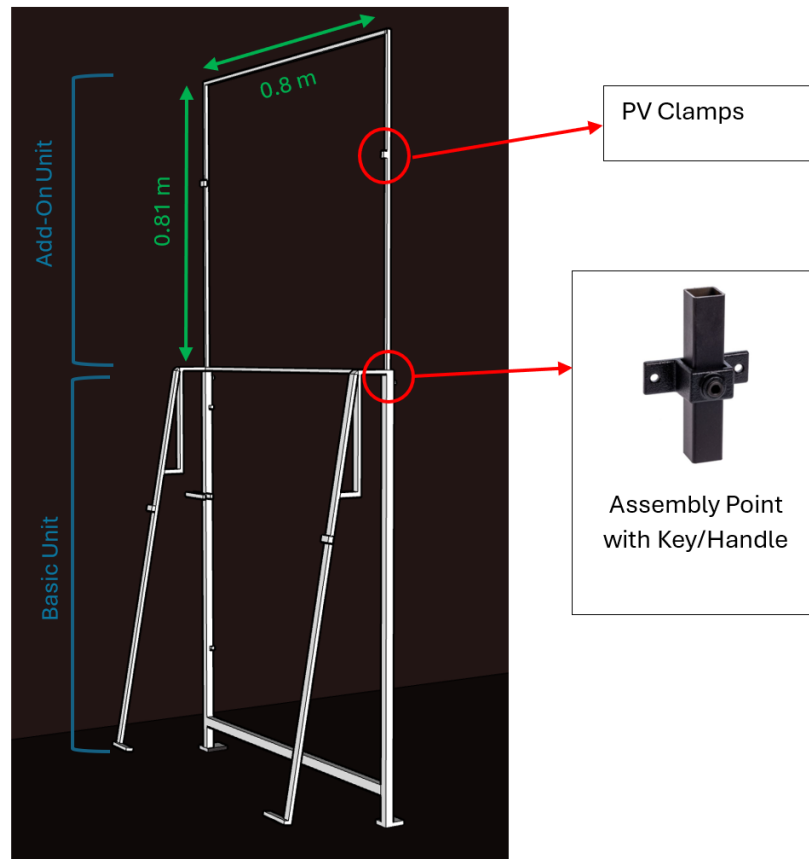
Privacy Plan Mounting Structure (Basic and Add-On units)
